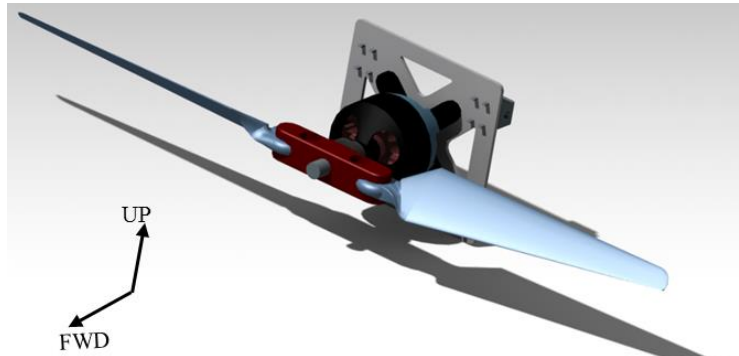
CAD model of the fixed-wing UAS motor subassembly
